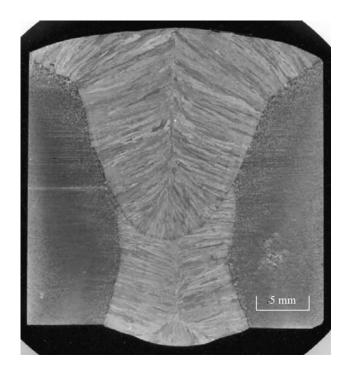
Macrostructure of a one-sided butt weld produced using SAW process with 25-mm-thick HSLA-65 steel plates, Lincoln MIL-800H flux, and a Hobart experimental metal-cored wire combination (Ref 19)
